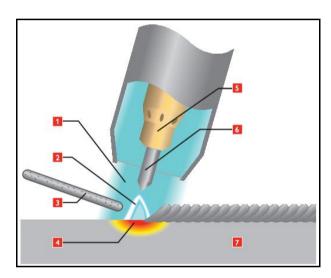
Gas Tungsten Arc Welding (GTAW)
